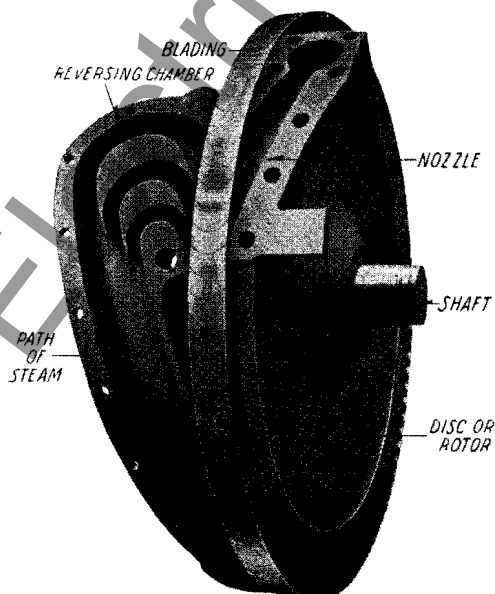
ROTOR WITH NOZZLE AND REVERSING CHAMBER
